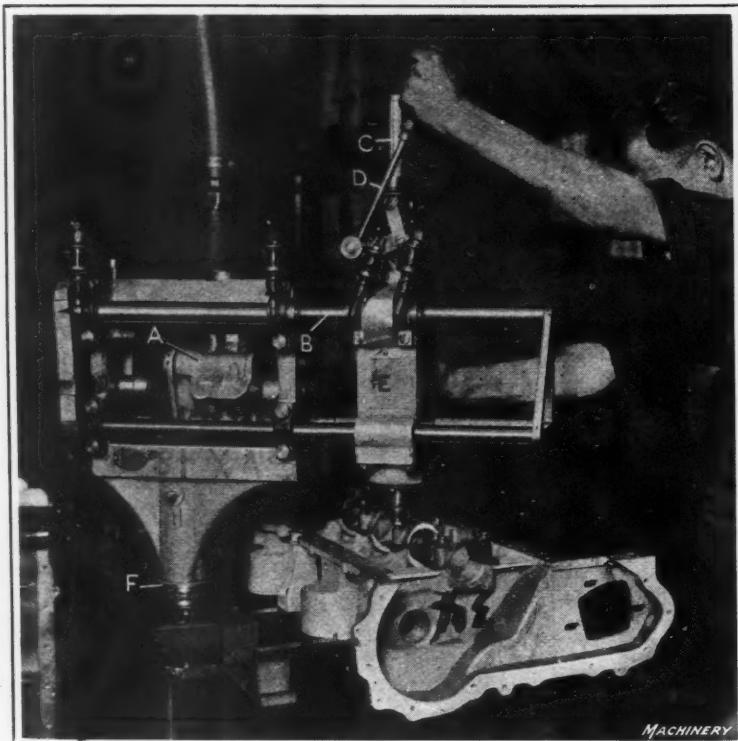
Brown Nut-driving Machine with Radial Adjustment
